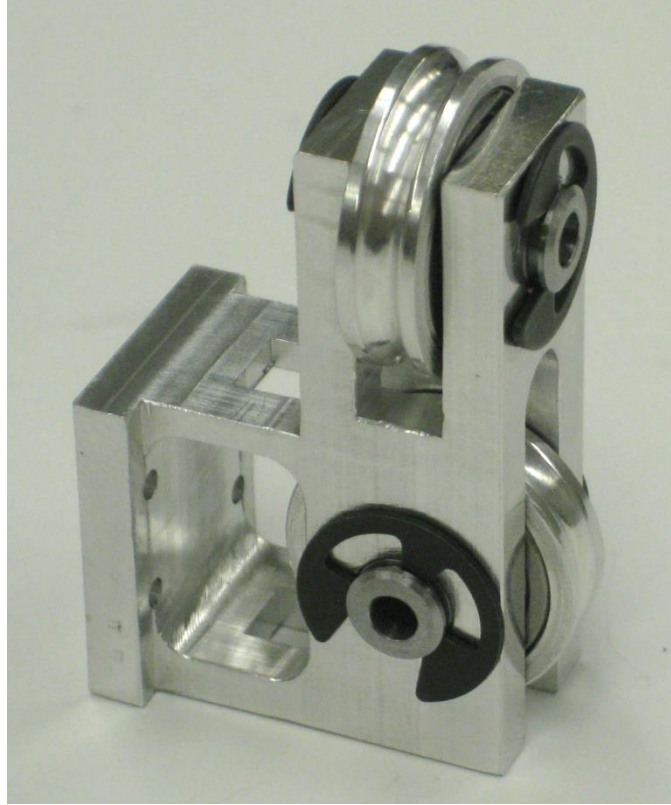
The carriage frame that holds the drive rope and spring cam idler pulleys. The lower pulley is the idler pulley for the spring mechanism. The upper pulley is the idler pulley for the simultaneous displacement rope. The ball bearing carriage (not shown) would be attached to the plate on the left side of the frame.
